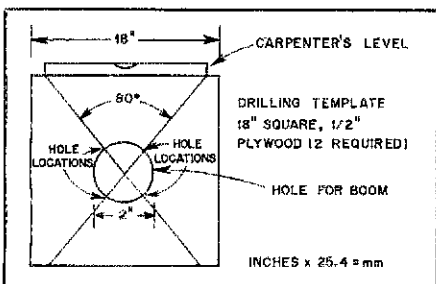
The drilling templates are used to locate the element mounting hole locations on the boom. A flat surface should be used to assure accuracy.
